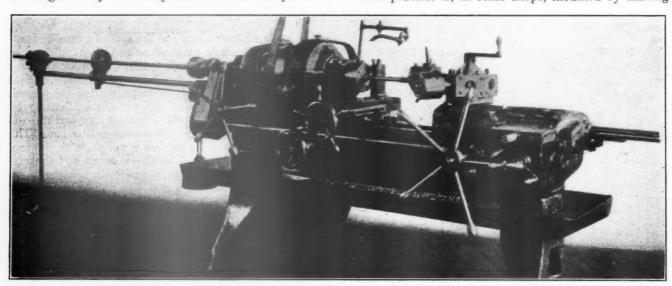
Threading and cutting off staybolts on a turret lathe, thus eliminating extra handling of the bars.
